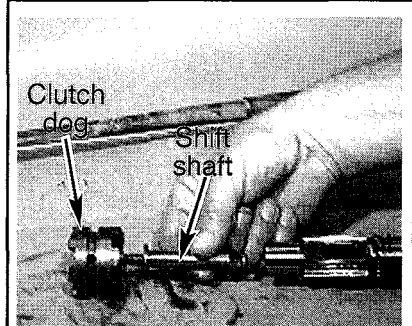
Remove the clutch dog to inspect the dog and shaft splines
